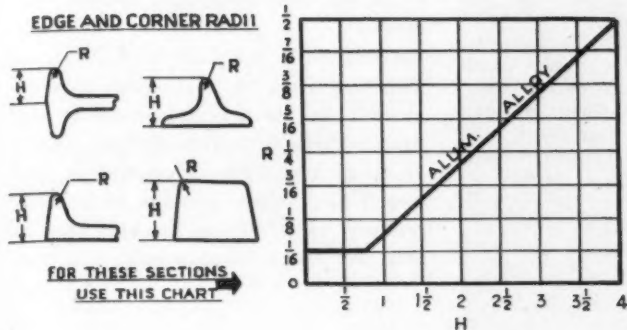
Recommended edge and corner radii for aluminum forgings.
